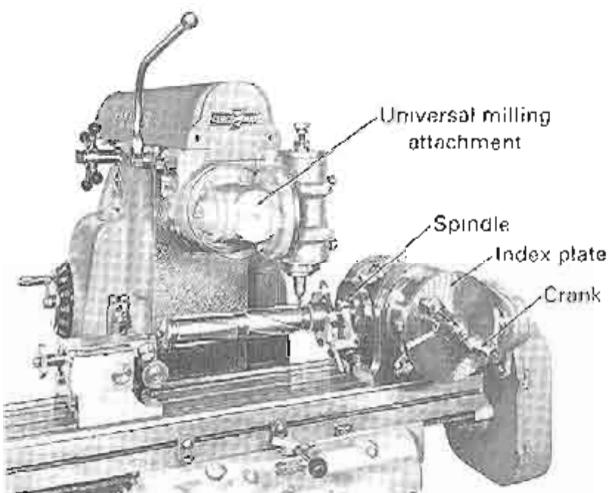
End milling a helical groove on a horizontal-spindle milling machine using a universal dividing head and a universal milling attachment. (Courtesy of Cincinnati Milacron, Inc.)
